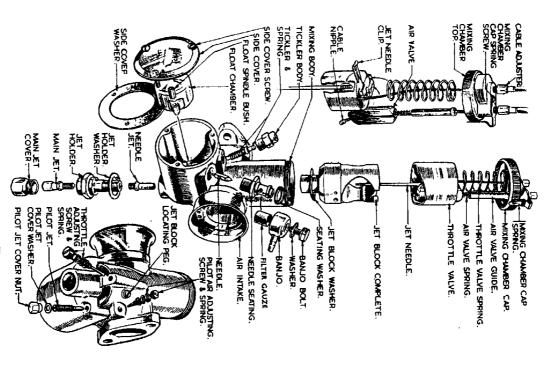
THE MONOBLOC CARBURETTER FITTED FROM 1955.
